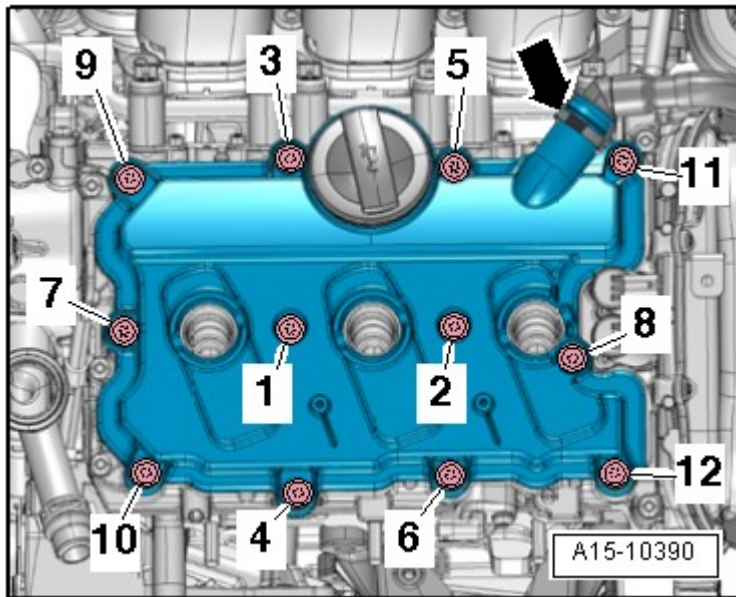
Left Cylinder Head Cover Bolt Tightening Sequence & Specification
